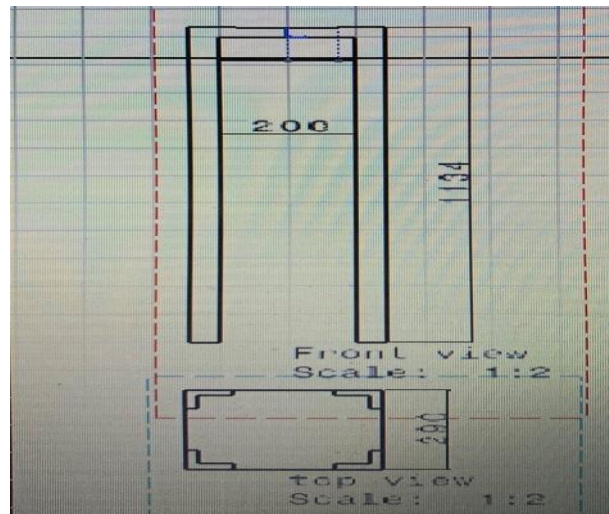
2D Drawings of Stacking/Assembly Table
